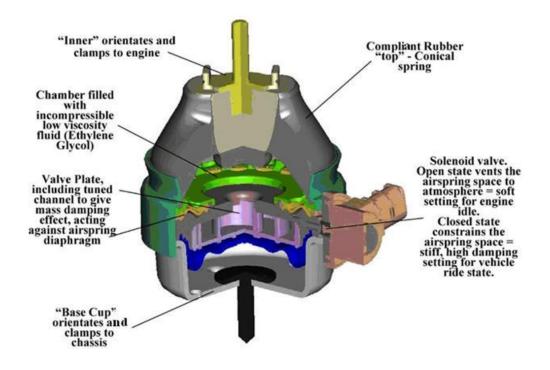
Quarter section view of a typical Avon 2 state switching engine mount.
